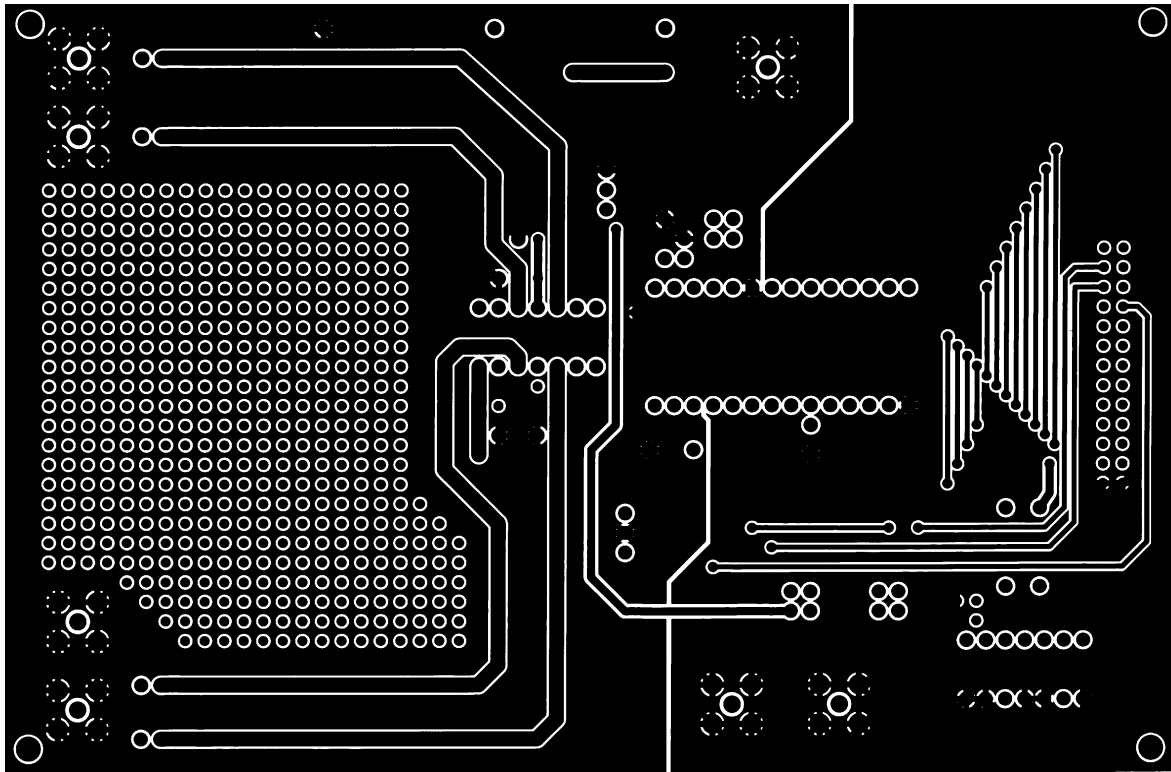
PCB Component Side Layout for the Circuit of Figure 20
